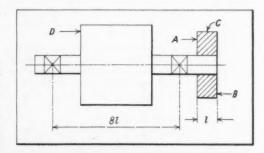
Set-up for Testing for Separate Indication of Force and Moment Unbalance. Unbalances may be Introduced in the Planes A and B of a Lightweight Wheel C Mounted on the Shaft of a Test Rotor D of Intermediate Size
